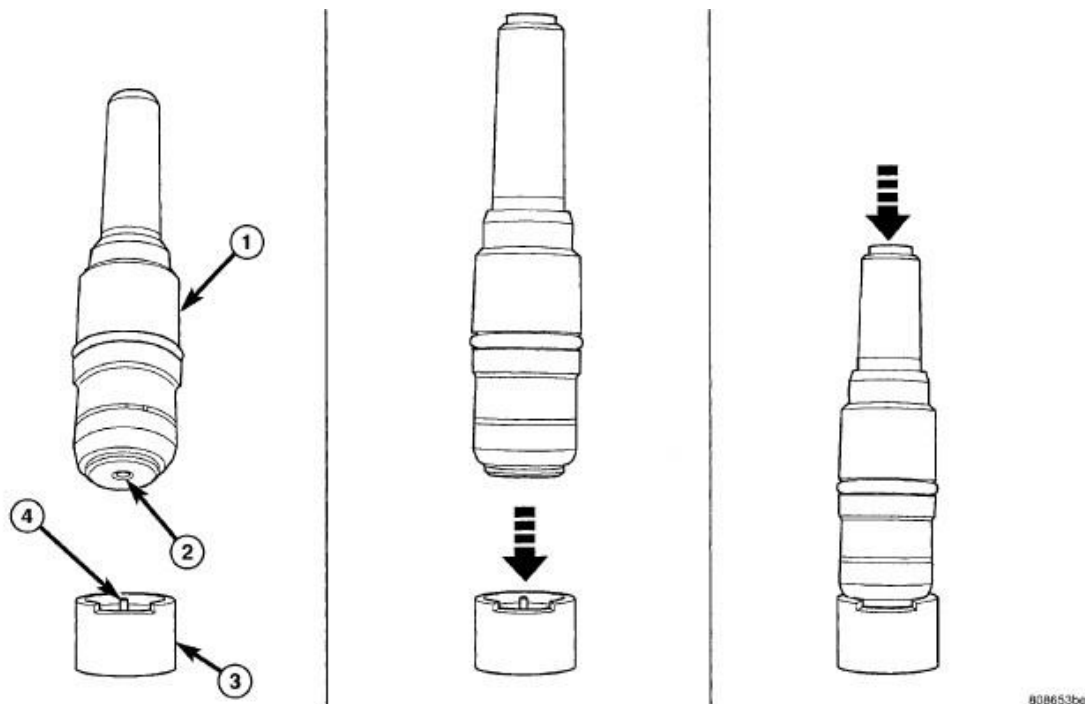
TIMING CHAIN TENSIONER - OIL PURGING
